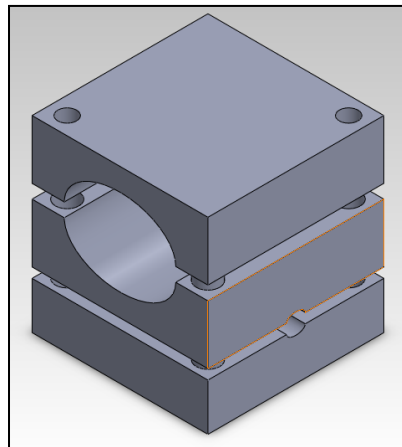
Three Piece "LEGO®" and Screw Clamp (Rod to Wire)
